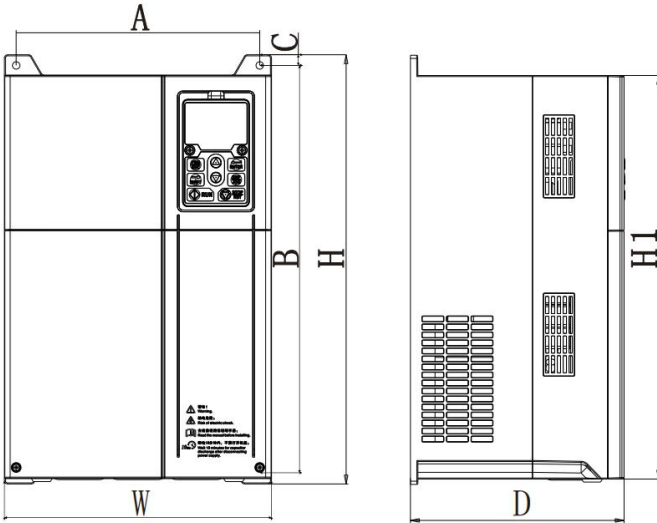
30~37 KW Plastic Casing External Dimensions and Installation Dimensions Diagram
